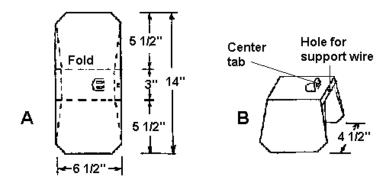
A) Sheet metal, 61/2 x 14 inches, B) Sheet metal folded into a flame shield
